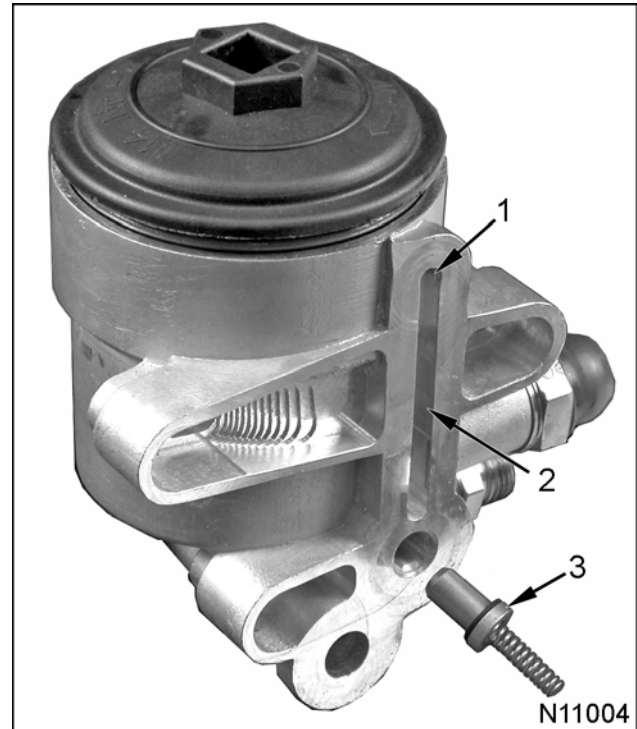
Secondary fuel filter housing and fuel pressure regulator
